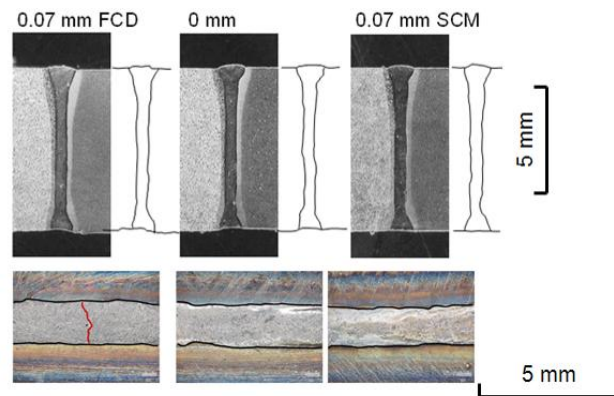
Full penetration welds, 8 mm^t, with and w/o misalignment, cross sections and weld bead
